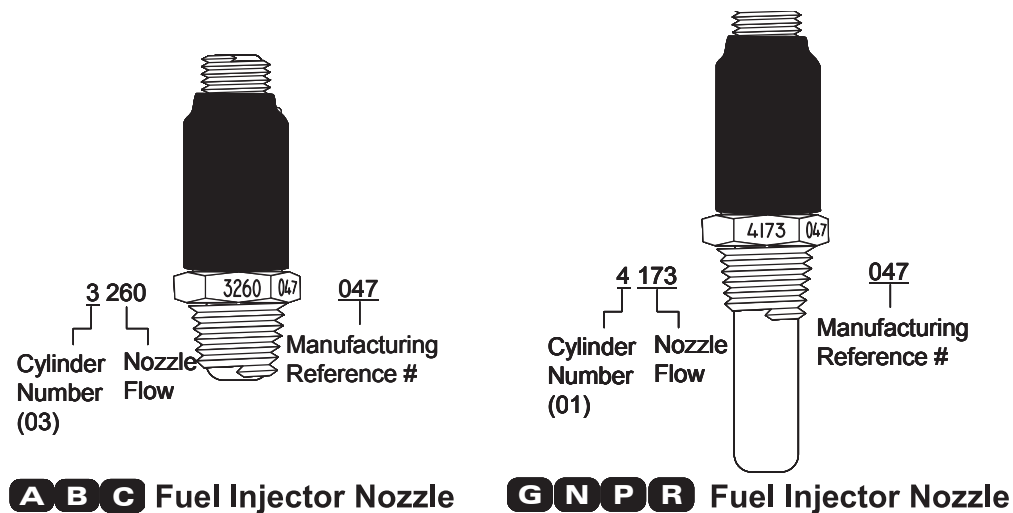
Post-2005 Position Tuned Fuel Injector Nozzle
